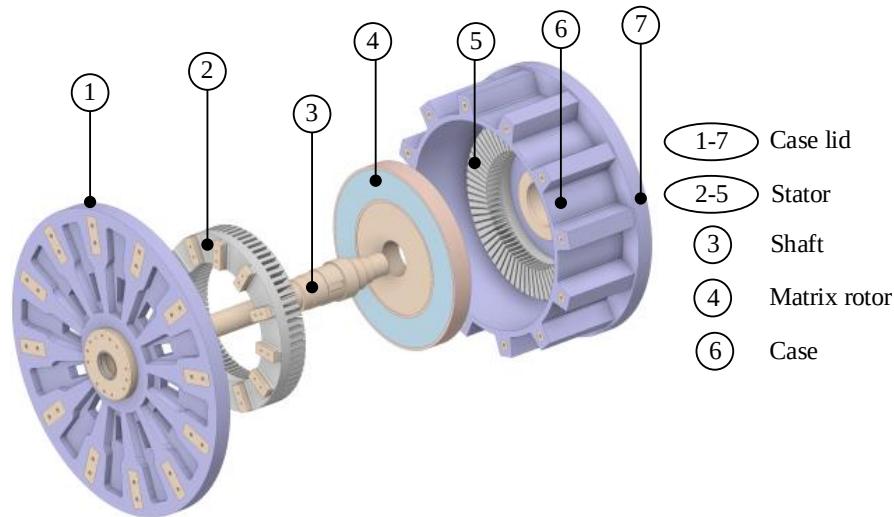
Exploded view of the AF-MRIM. The mechanical parts of the machine are listed for clarity.
